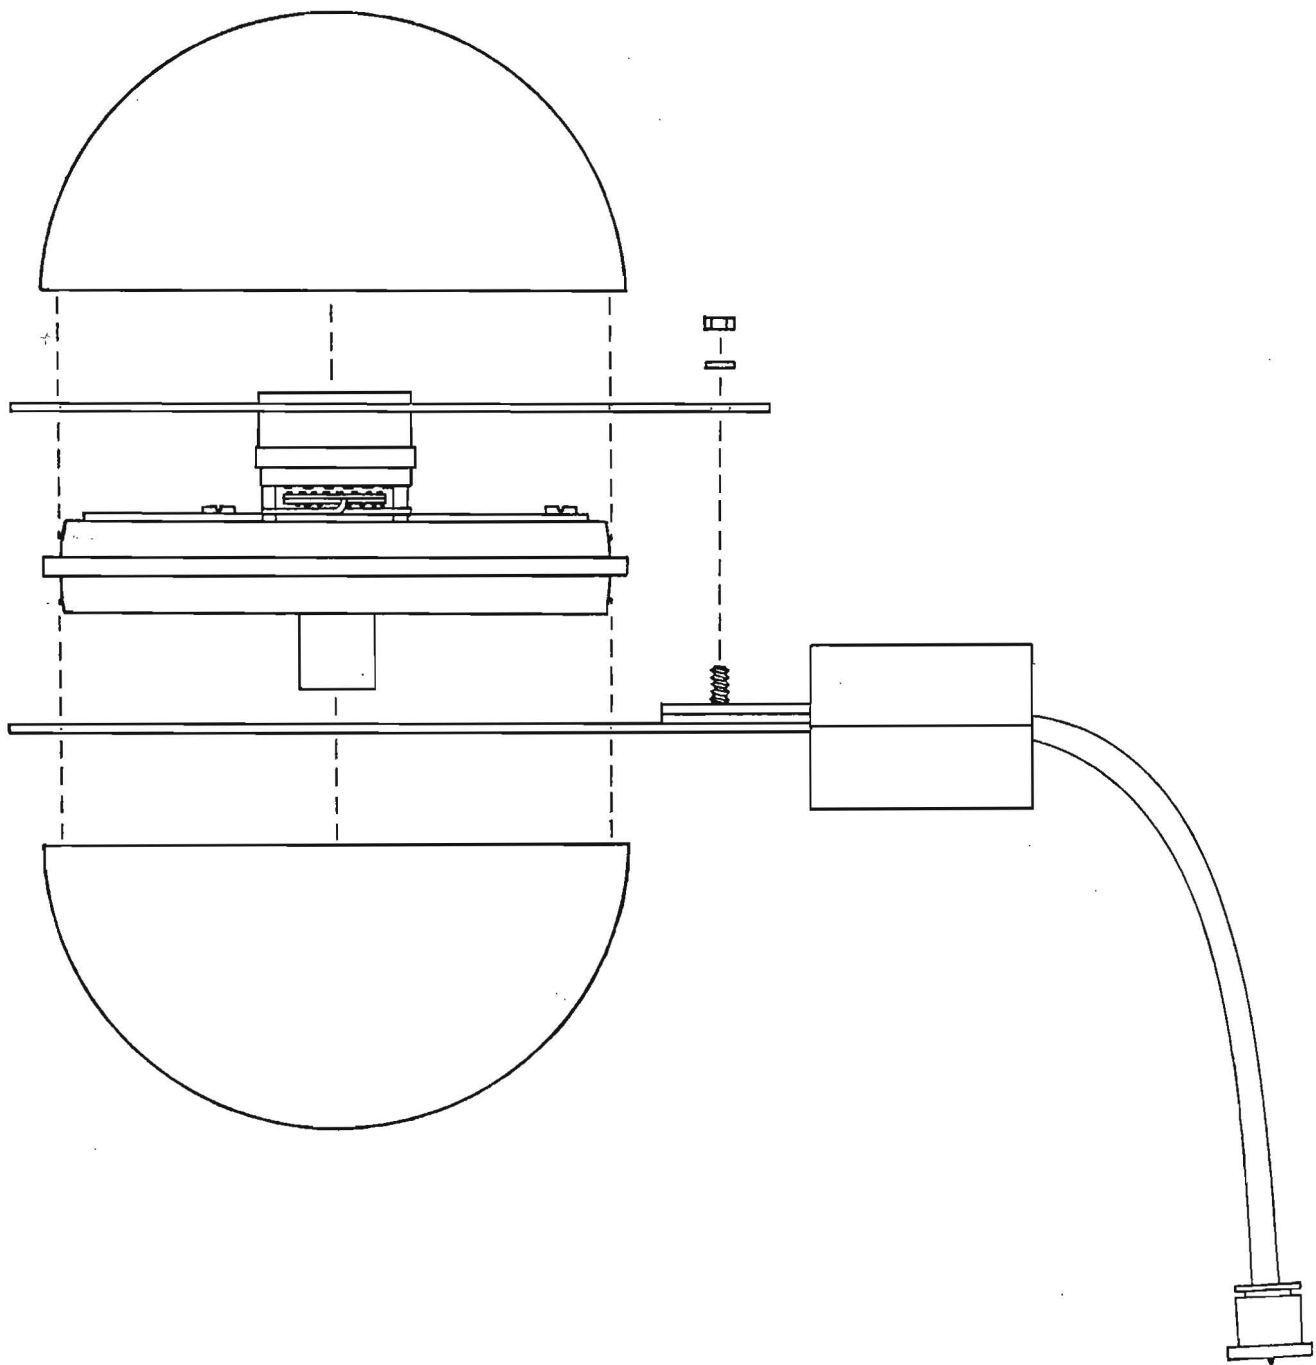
Exploded View Showing Assembly of Spherical Dipole onto the Conducted Measurement Setup Attachment Fixture.
